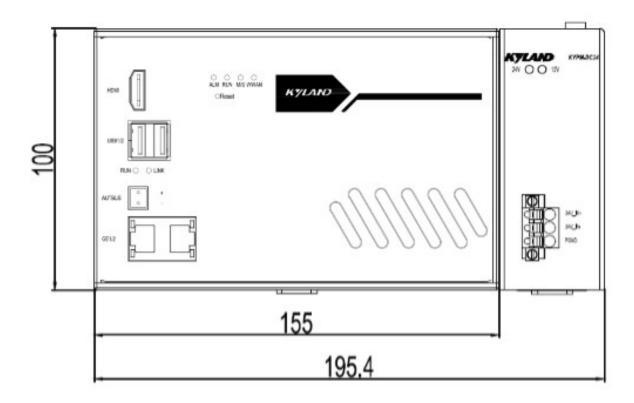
NewPre5100-P611-M1-D0-N1-A1 installation dimension drawing (Unit: mm)
